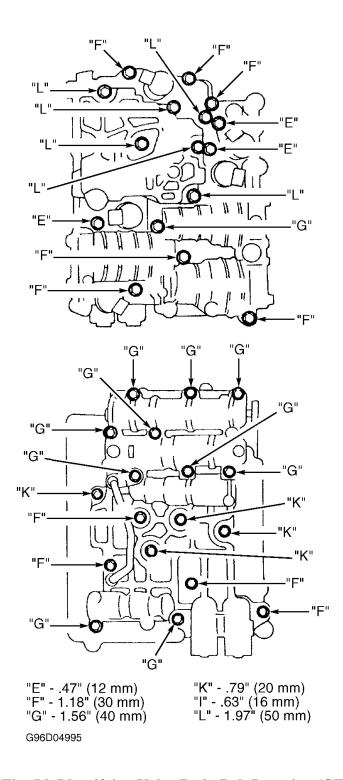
Identifying Valve Body Bolt Location (GF4A-EL) Courtesy of MAZDA MOTORS CORP.
